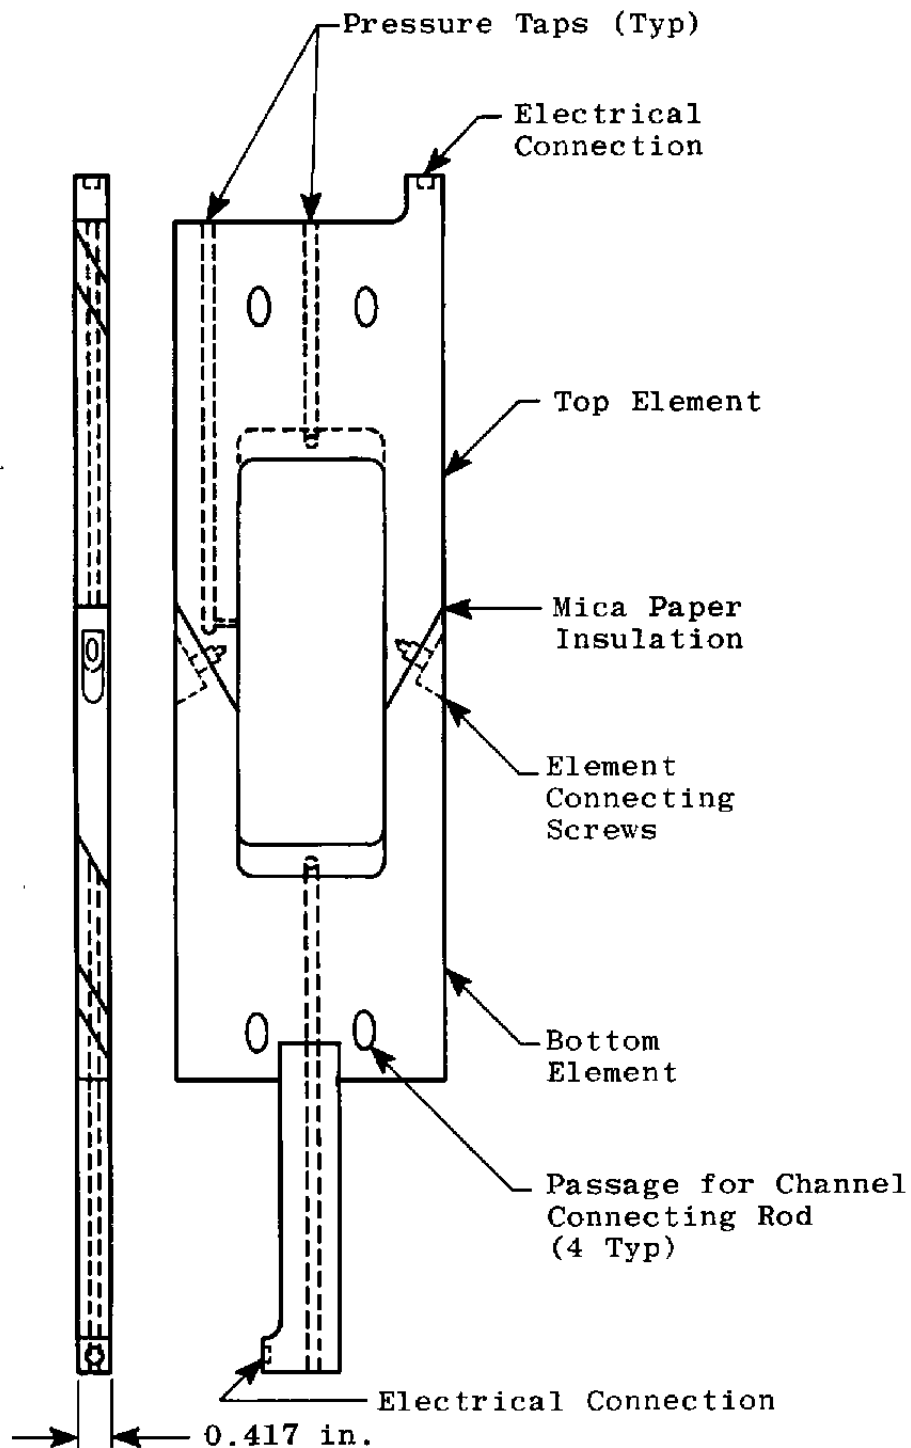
Schematic of Typical 45-deg-Slant Wall Channel Segment
